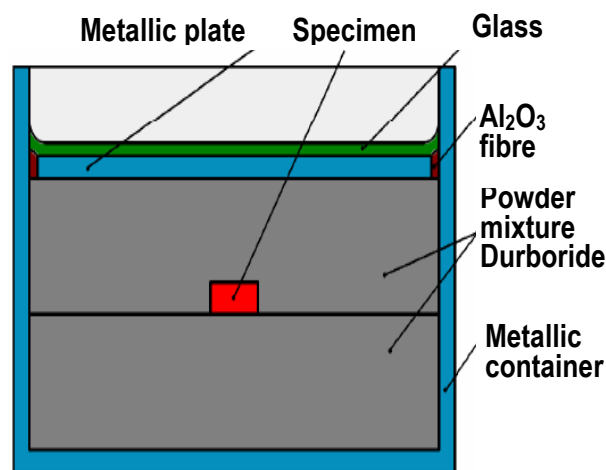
Schematic illustration of the thermo-chemical device used for the boride layer developing
